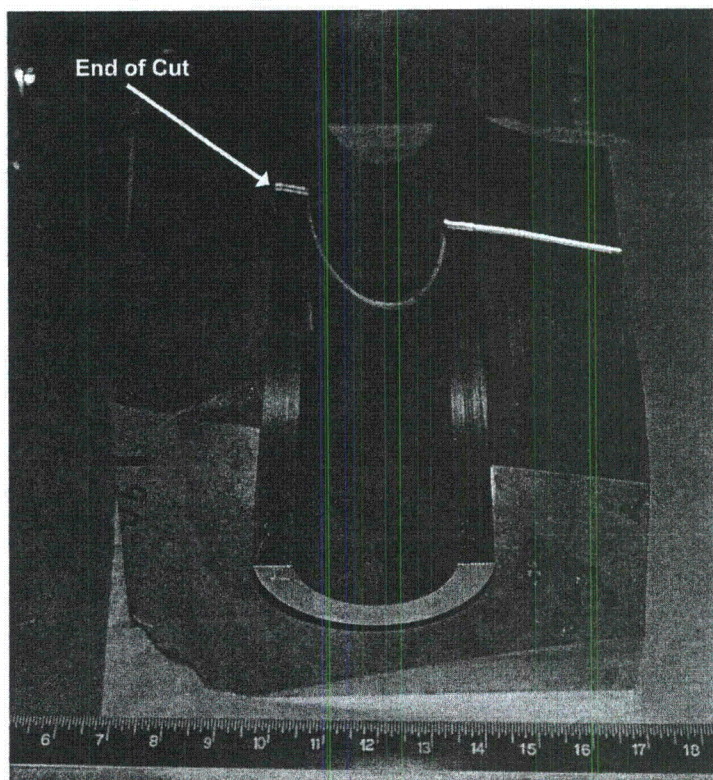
End of J-groove Weld Removal Cut
